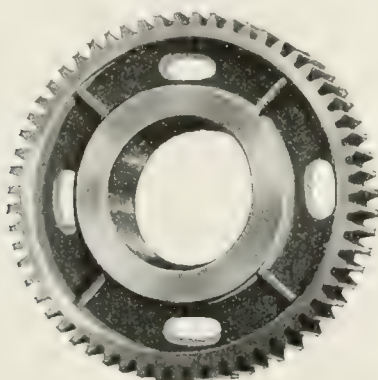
AN EXAMPLE OF OLD-STYLE GEAR
